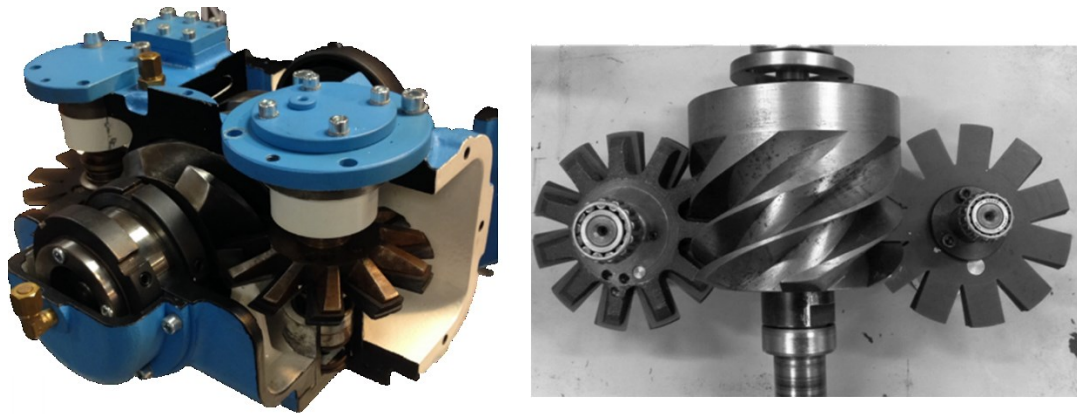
single-screw expander: complete machine (left), screw and starwheels (from [35], right)
